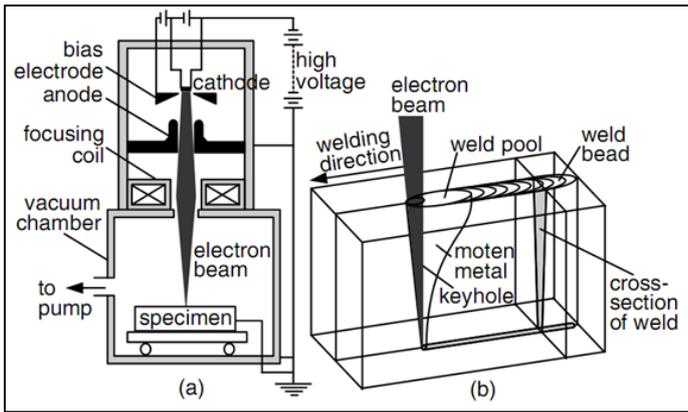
An Electron Welding Beam generation equipment.
